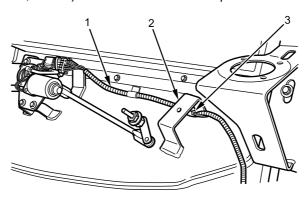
Windshield Wiper Motor Harness Routing On Bulkhead.
